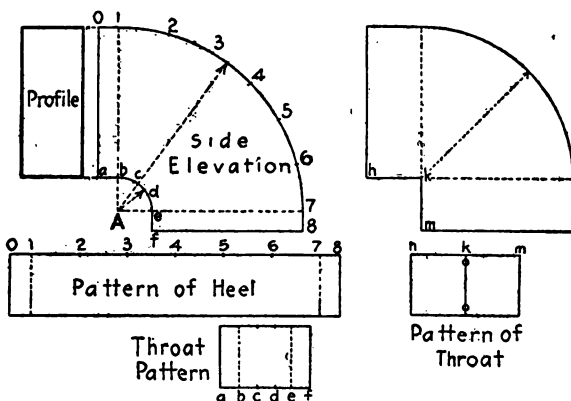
Elevation and Patterns of Rectangular Elbows.
